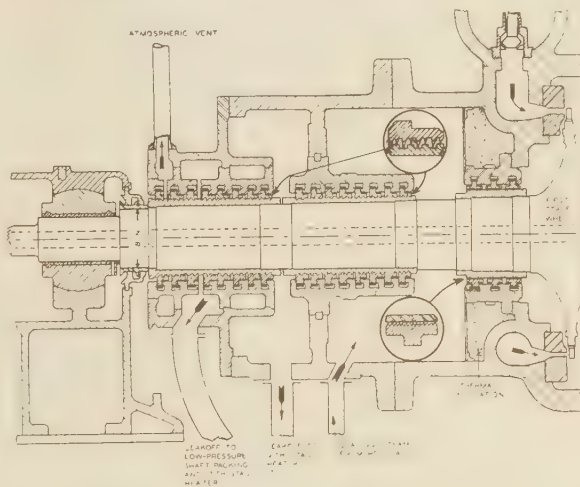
SECTIONAL VIEW OF HIGH-PRESSURE SHAFT PACKING
